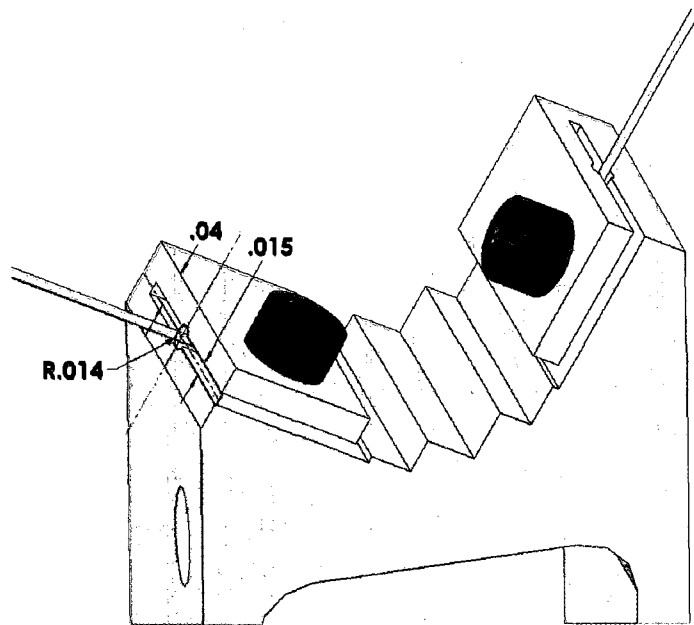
Wire mount hole and slot. Dimensions in inches.
